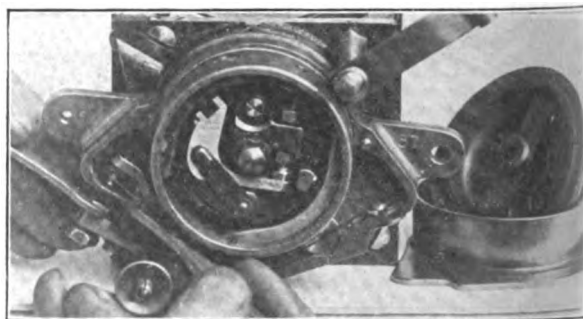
Showing Method of Adjusting Points of Battery Breaker Mechanism and How Gauge Is Utilized to Obtain Correct Gap.
